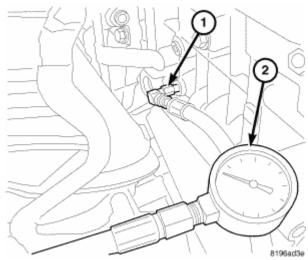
OIL PRESSURE GAUGE Courtesy of CHRYSLER LLC
